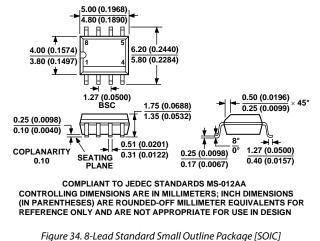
8-Lead Standard Small Outline Package [SOIC, Narrow Body (R-8) S-Suffix Dimensions shown in millimeters and (inches)
